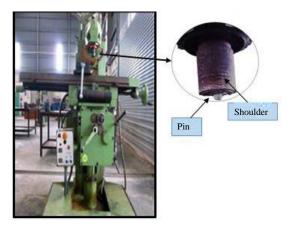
Underwater Friction Stir Welding (UFSW) tool
